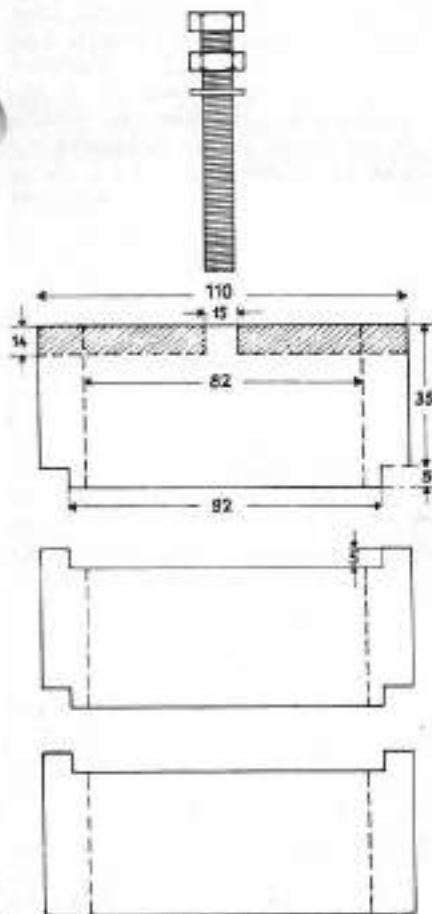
Extraction tool for king pin can be fabricated locally using dimensions shown. Dimensions are in millimeters. Removal of king pin will be a three-step procedure when using this tool.
